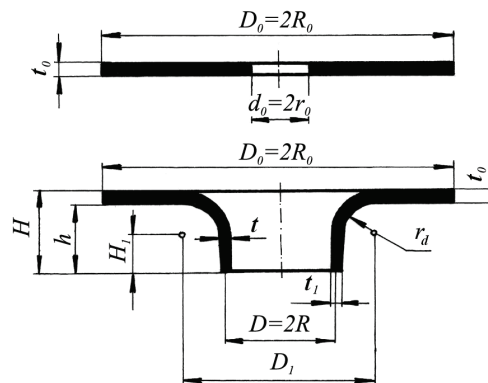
Geometrical Parameters of the Blank and the Finished Part
